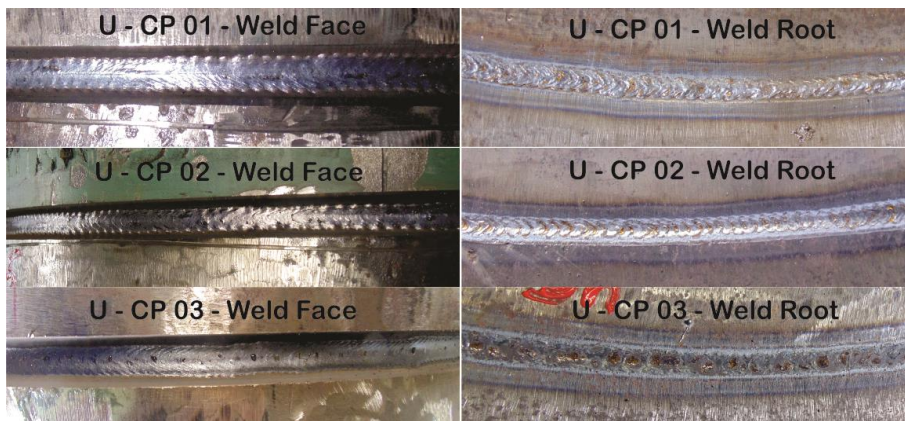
Welds in pipes 18 inch diameter and 7/16 inch wall thickness.
